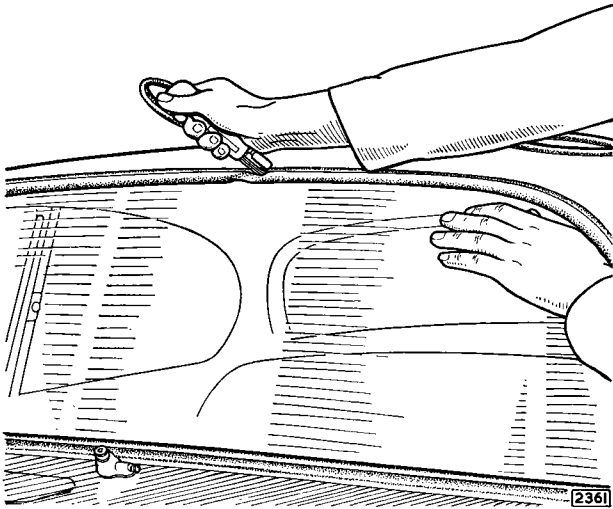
Using the special tool ("B", Fig. 14) when inserting the rubber sealing strip in the windscreen rubber
